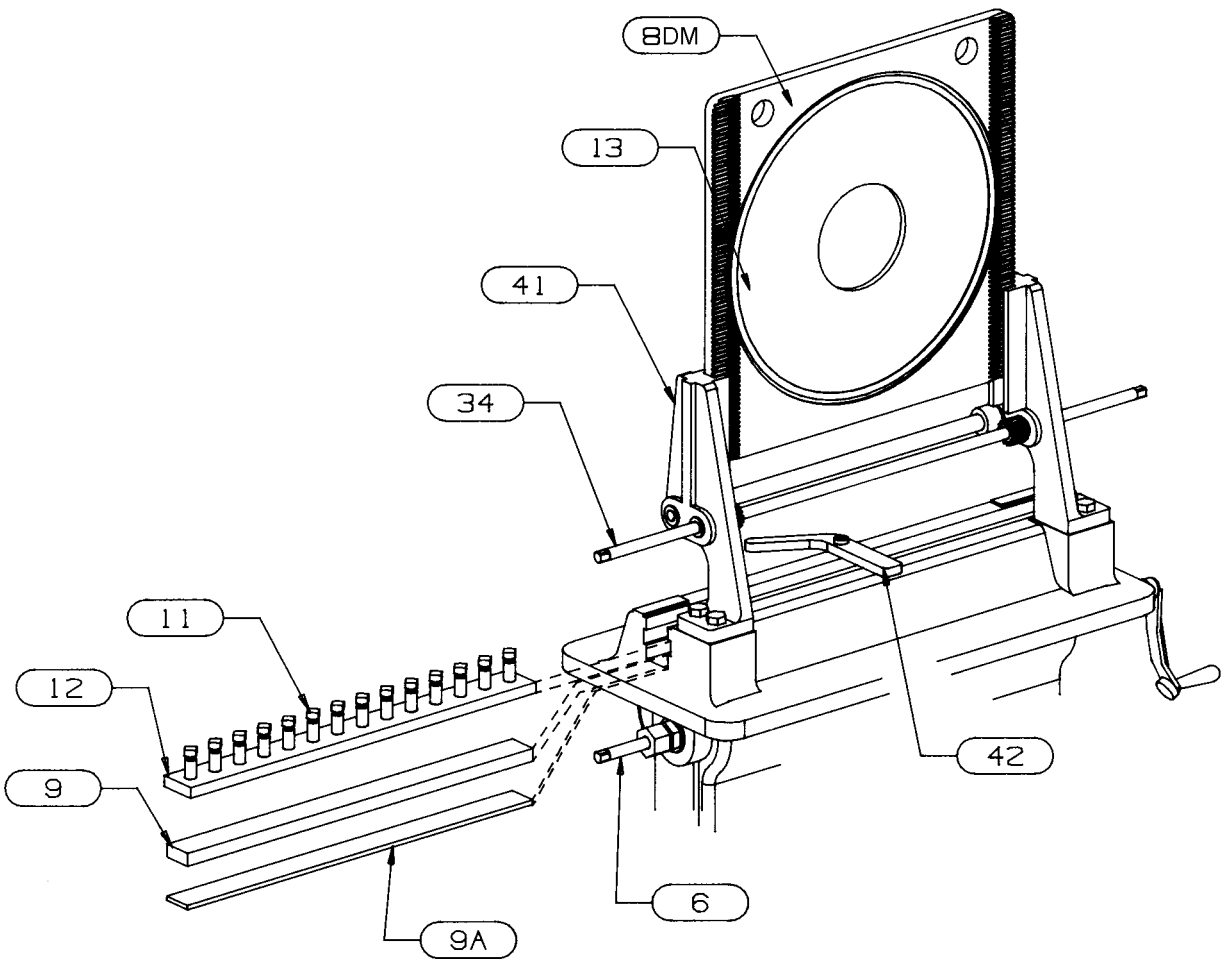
Components Involved in Plate Removal and Insertion Process
